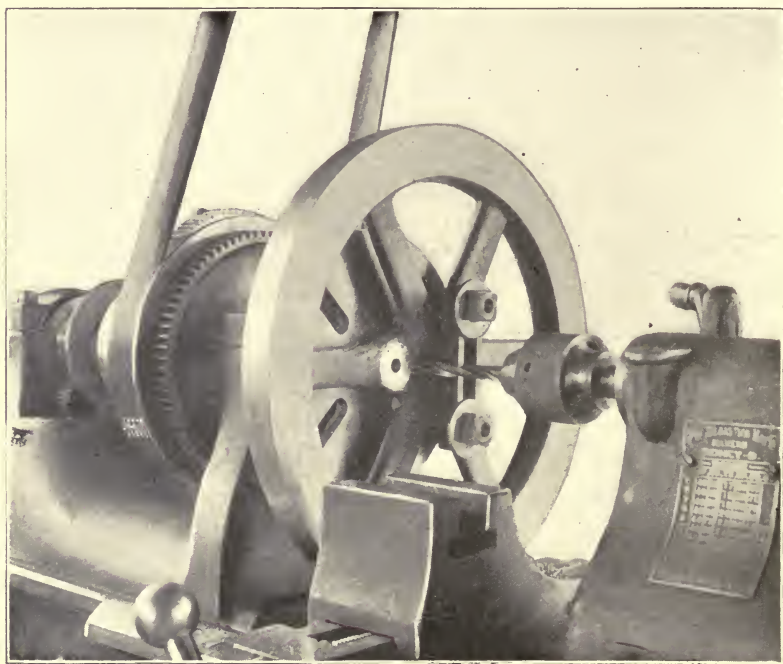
DRILLING FLY-WHEEL FOR CRANK PIN.
